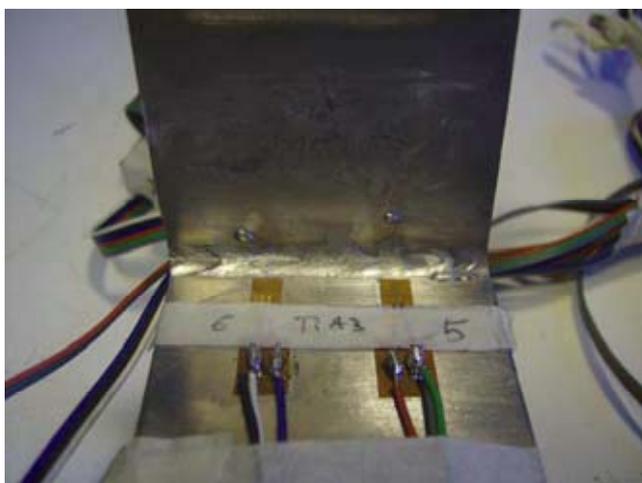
Disposition of strain gauges on the welded specimen.
